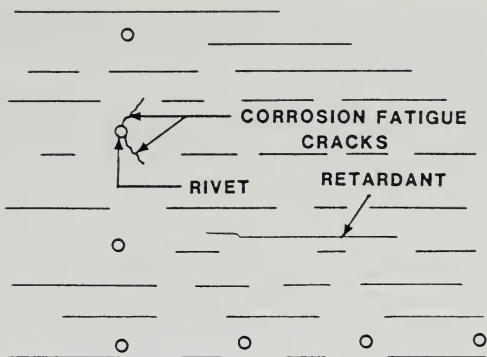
Corrosion fatigue cracks on aluminum fuselage panel.
